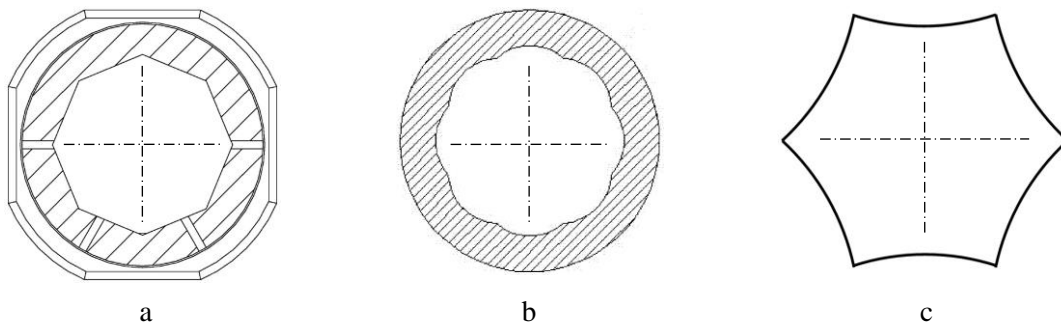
Cross-section of the single-screw presses barrels press section:
